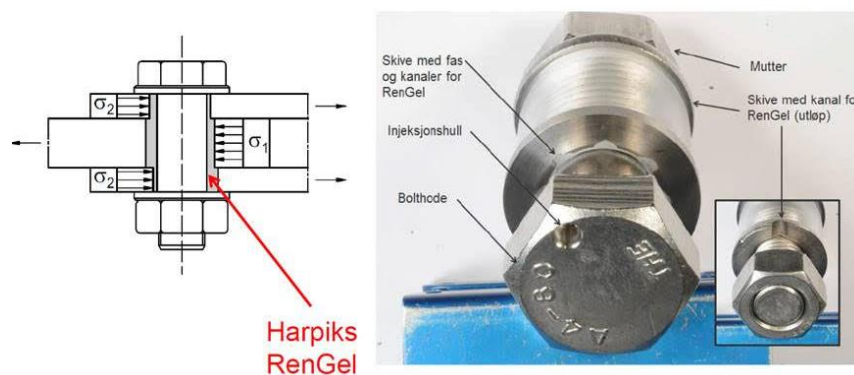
Injection hole on bolt head for injecting epoxy resin (1)
